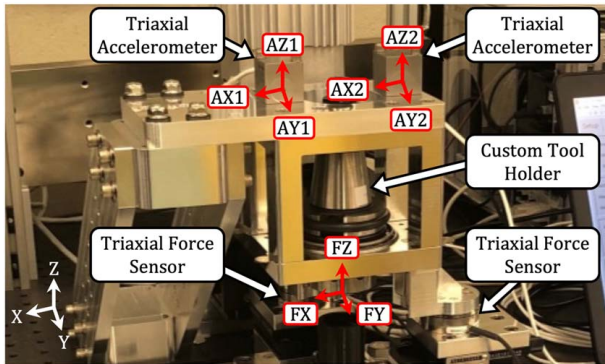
Spindle testbed comprising a custom tool holder, accelerometers, and force sensors
